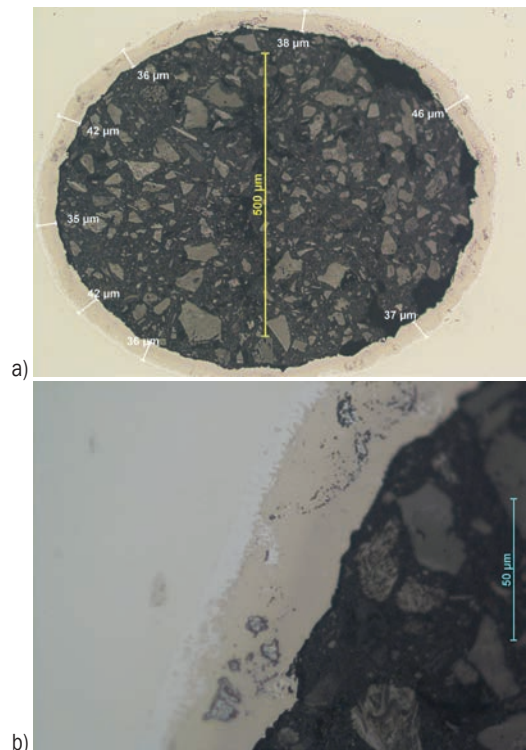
Section view of type "B" hole drilled with 0.4 mm electrode; a) complete hole view, and b) coating debris
